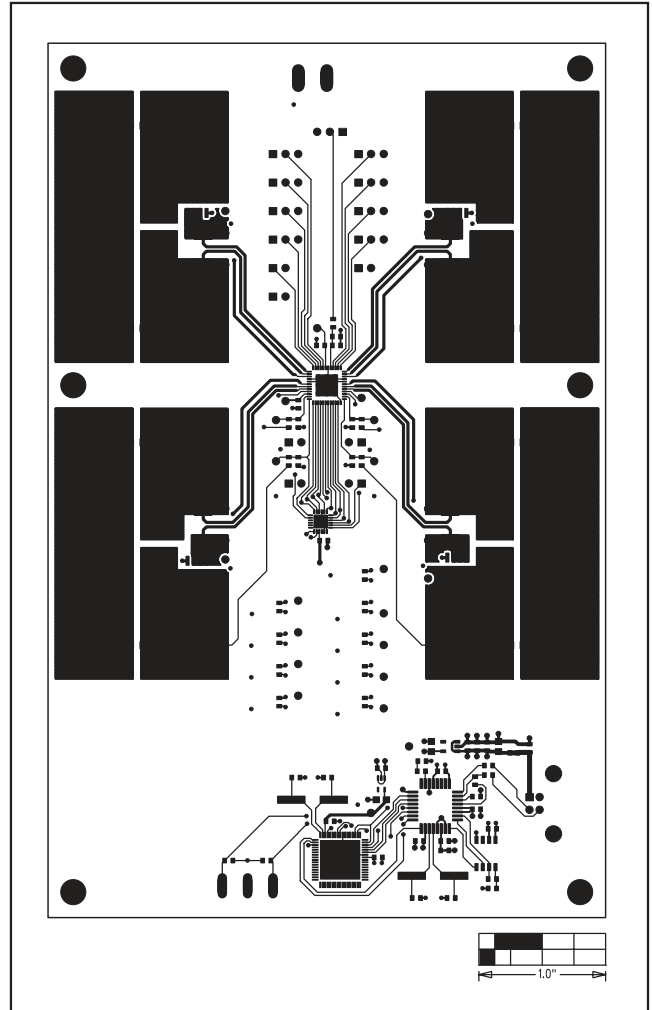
MAX5961 EV Kit PCB Layout—Component Side
